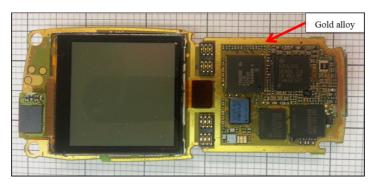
Photograph of the coated Au on the surface of a mobile phone PCB.
